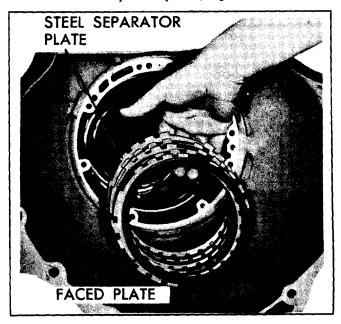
G-151 Installing Low and Reverse Clutch Pack
